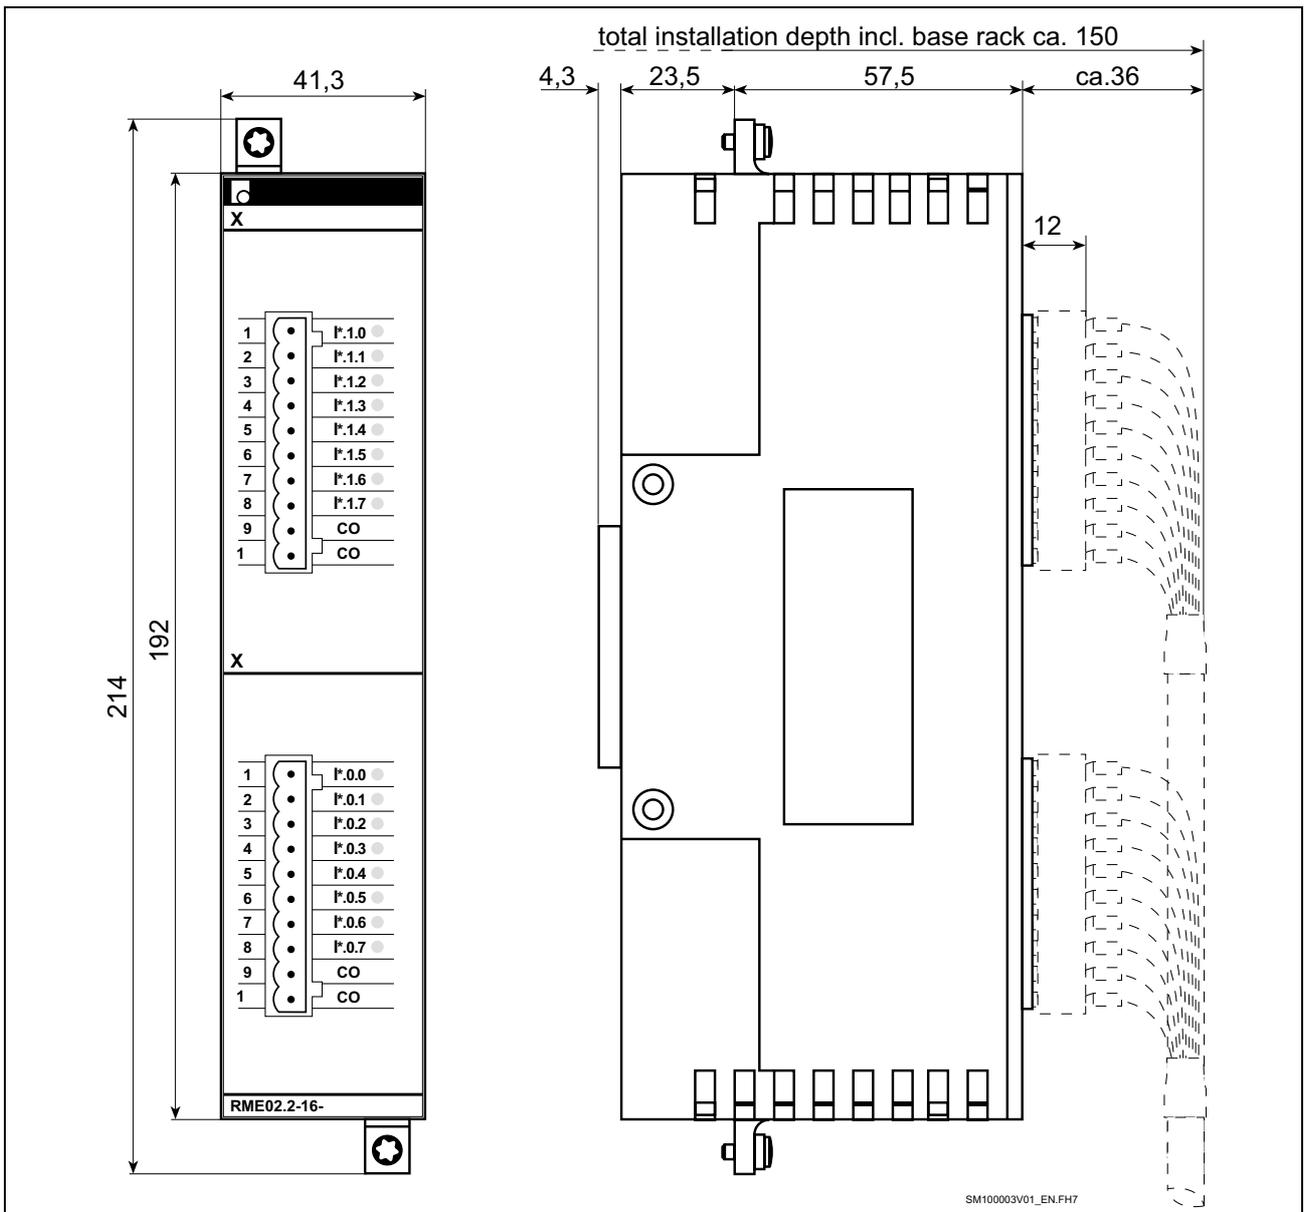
Dimensional sheet RME02.2-16-AC115
